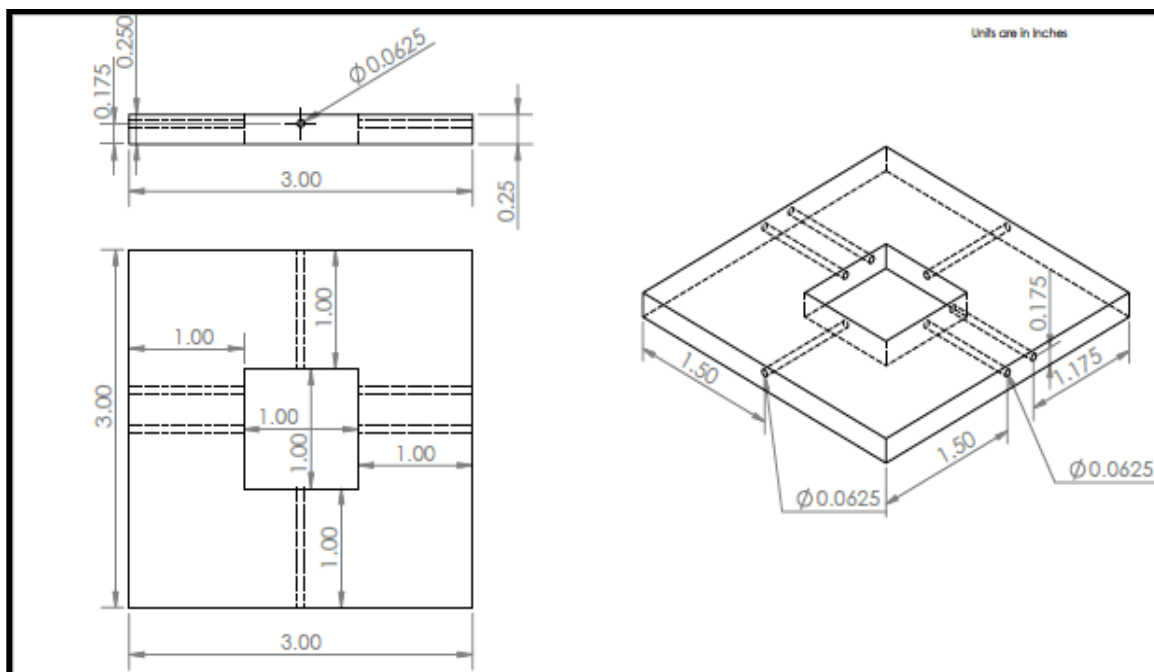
SolidWorks schematic of the lower quartz plate utilized in the 2-dimensional experimental setup. Imperial unit dimensions are used in the Solidworks drawing as the manufacturing company required them.
